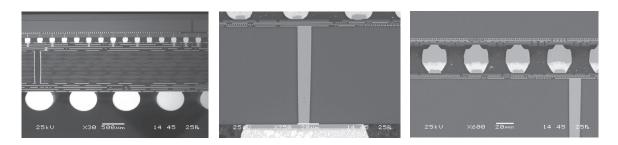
Cross-sections of (a) overall assembly, (b) TSV interposer, and (c) µbumps
